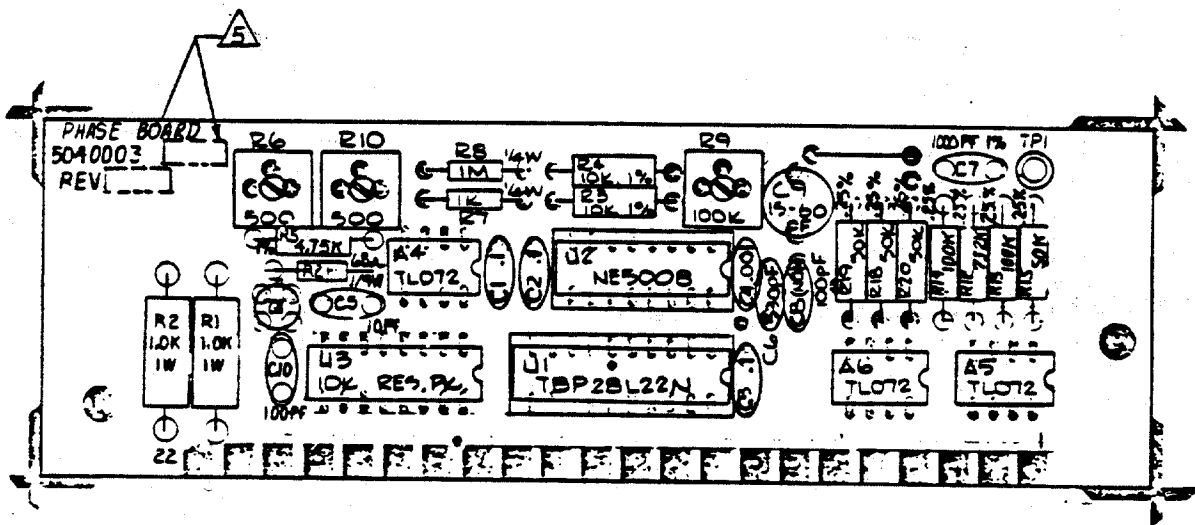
Model 400SD/SP Phase Board Assembly Drawing
